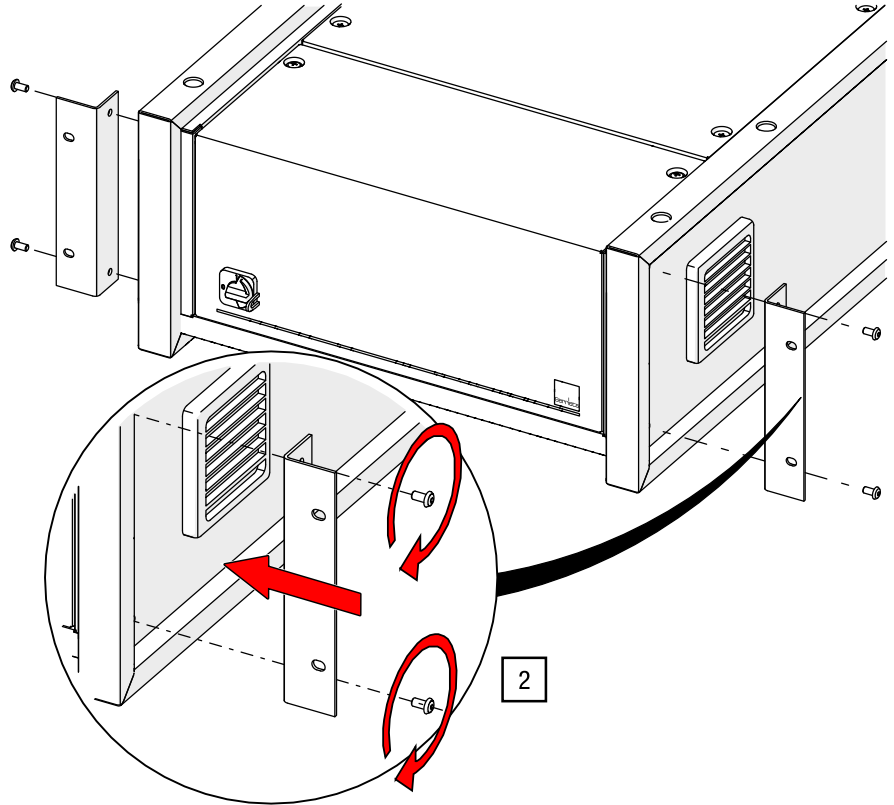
Screw on the rack mounting bracket (control unit model may vary)
